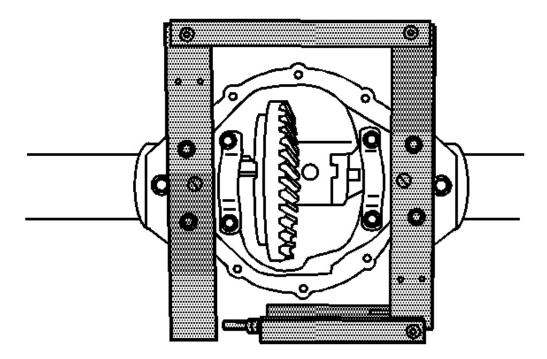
View Of J 45222 & Axle Housing Courtesy of GENERAL MOTORS CORP.
